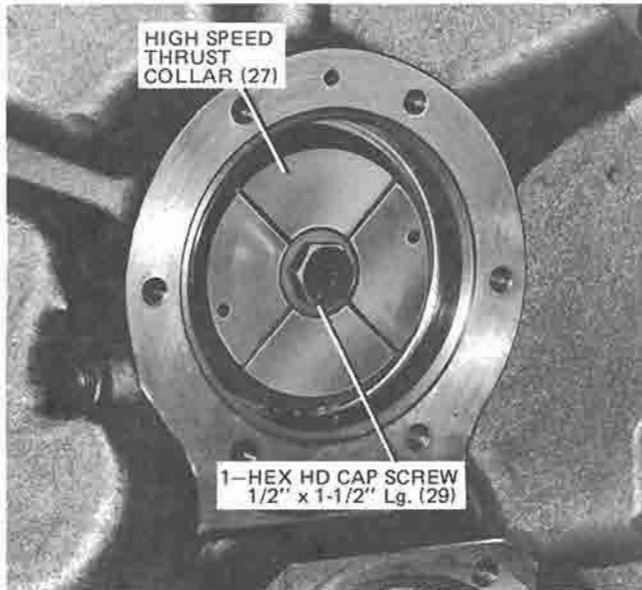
ASSEMBLY OF REAR HIGH SPEED THRUST COVER
